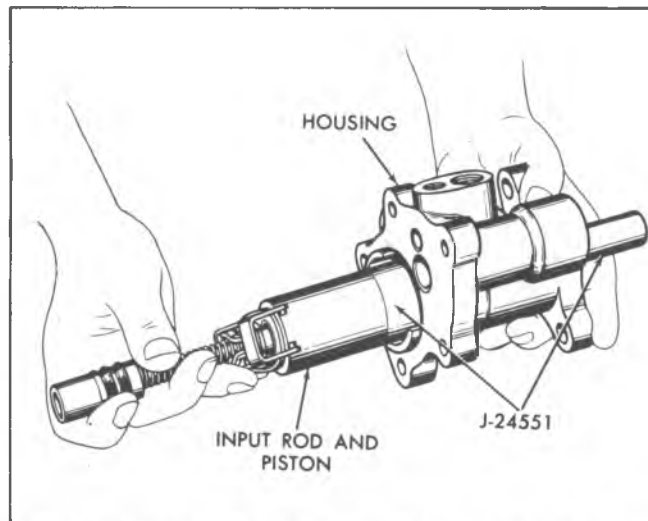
Installing Input Rod and Piston Assembly into Booster (Typical)
